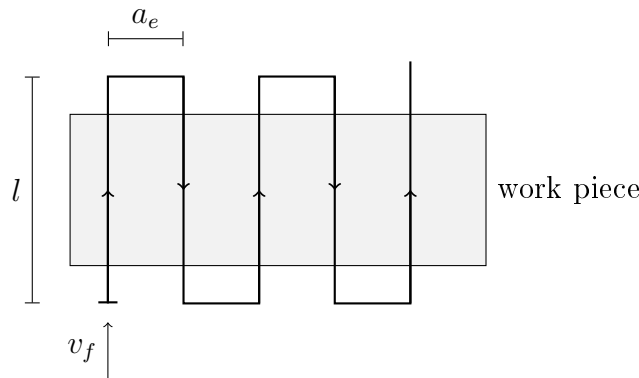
Example cutting path $\varphi(t)$ of cutting tool on a rectangular workpiece, displayed in top view.
